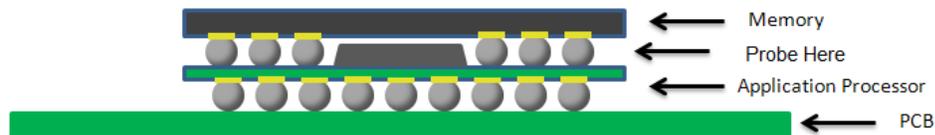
Side view (Drawing) of the PoP memory soldered onto a processor
